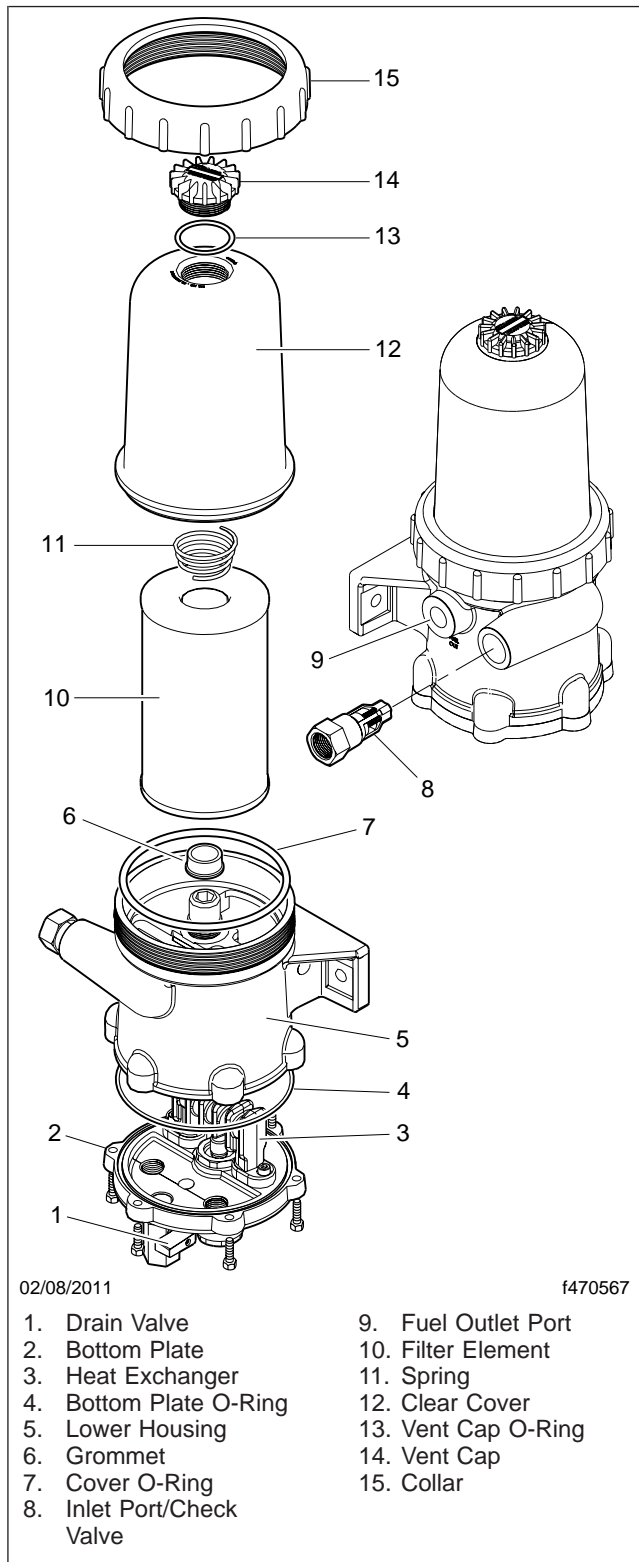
, Fuel/Water Separator (Fuel Pro 382 shown)
